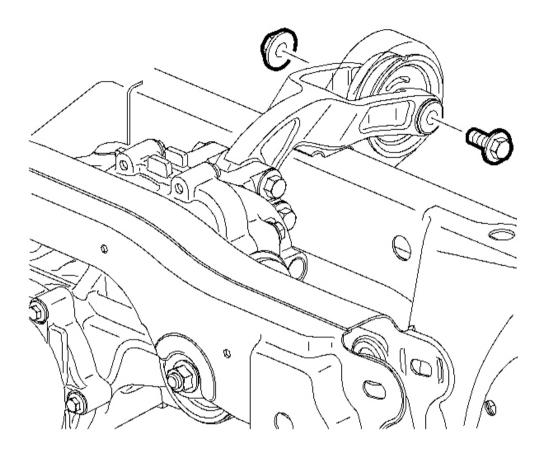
Rear Drive Module, Bracket, Bolts & Nuts Courtesy of GENERAL MOTORS CORP.
